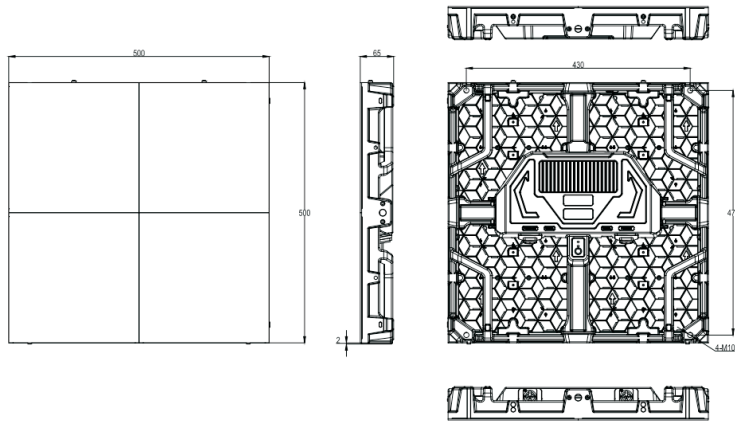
Outline drawing of Mwall wire connection power supply cabinet
